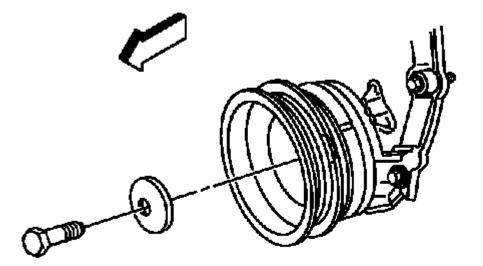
View Of Crankshaft Balancer Washer & Bolt Courtesy of GENERAL MOTORS CORP.
